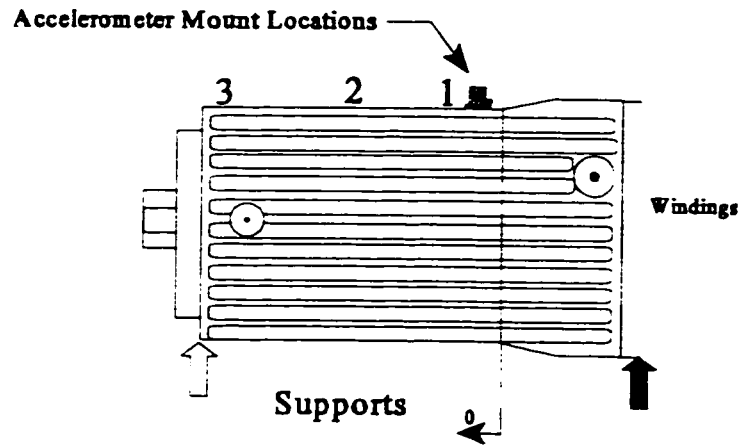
Motor Spindle Housing F.R.F. Layout
